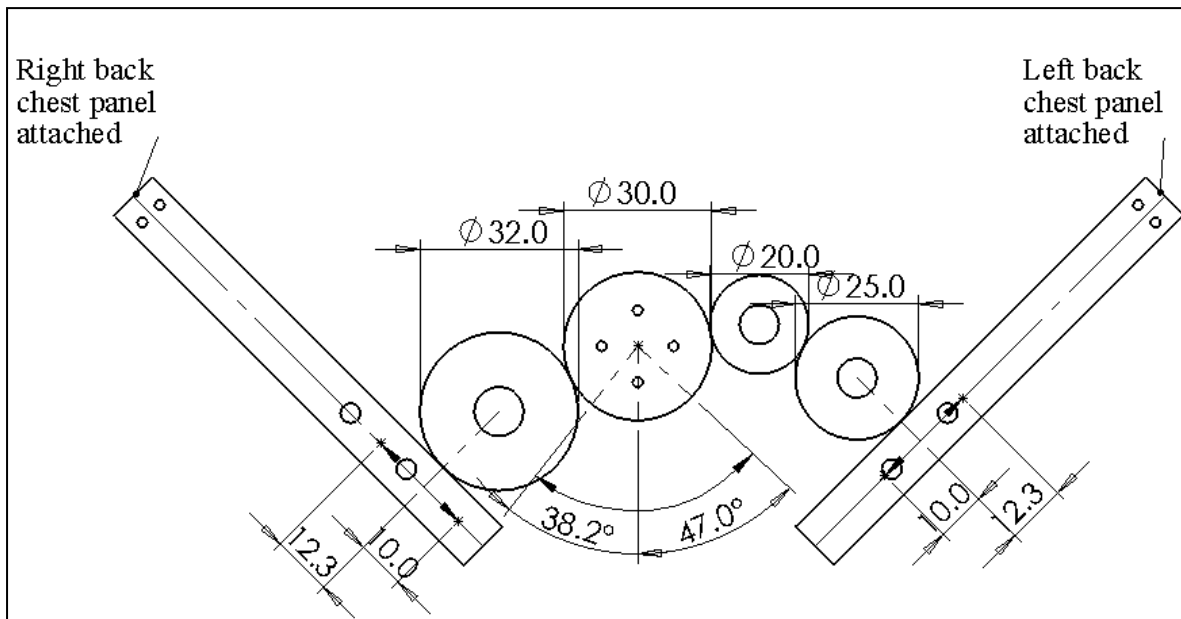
Back chest mechanism schematic diagram. The solid arrow shows the movement direction. All the linear dimensions are in mm.
